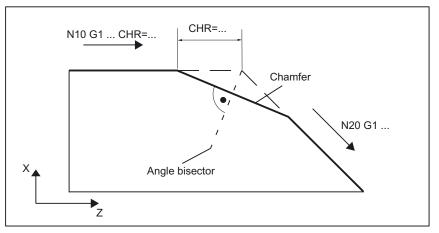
Inserting a chamfer with CHR using the example "Between two straight lines"
